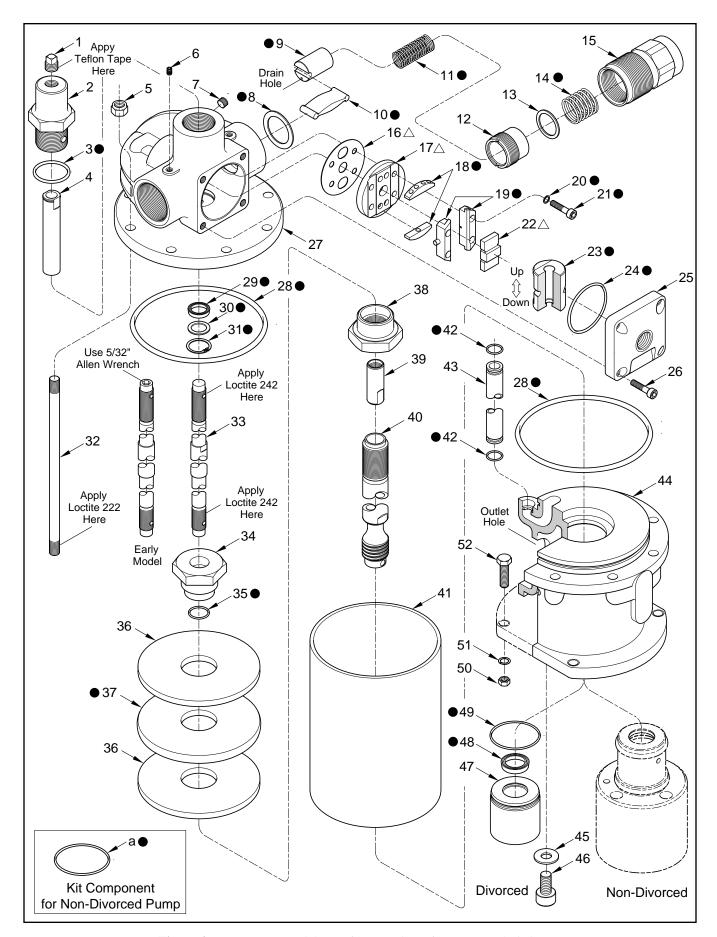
Air Motor Models 323640-4 and 323640-A1 - Exploded View
